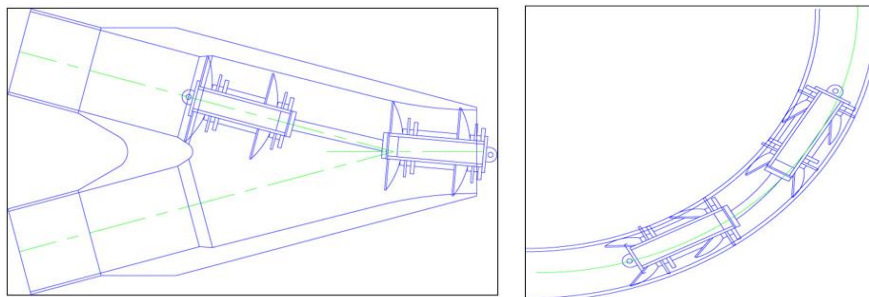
Examples of dual module pigs passing through a 24" wye piece and 16" 5D bend.
